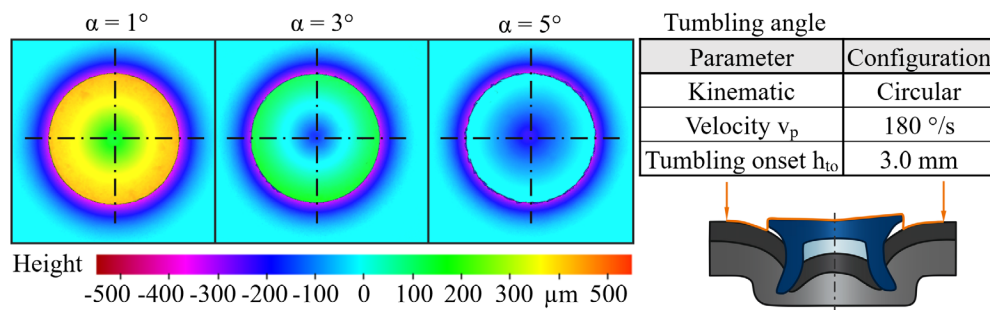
Analysis of the rivet head geometry with varying tumbling angle.
